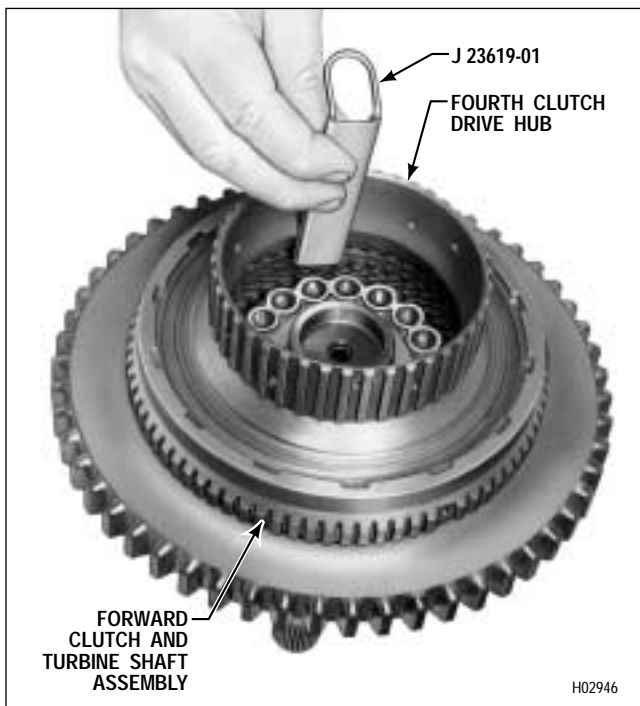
Checking Forward Clutch Clearance (Models Without Wave Plate)
